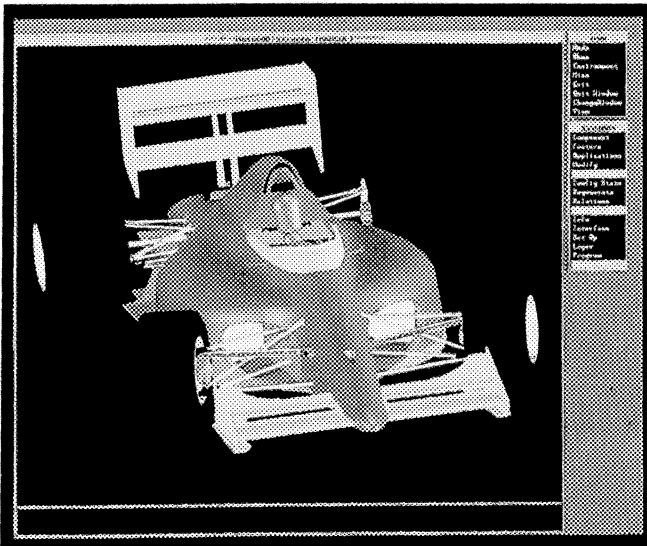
(a) Indy Race Car Designed with Pro/ENGINEER
